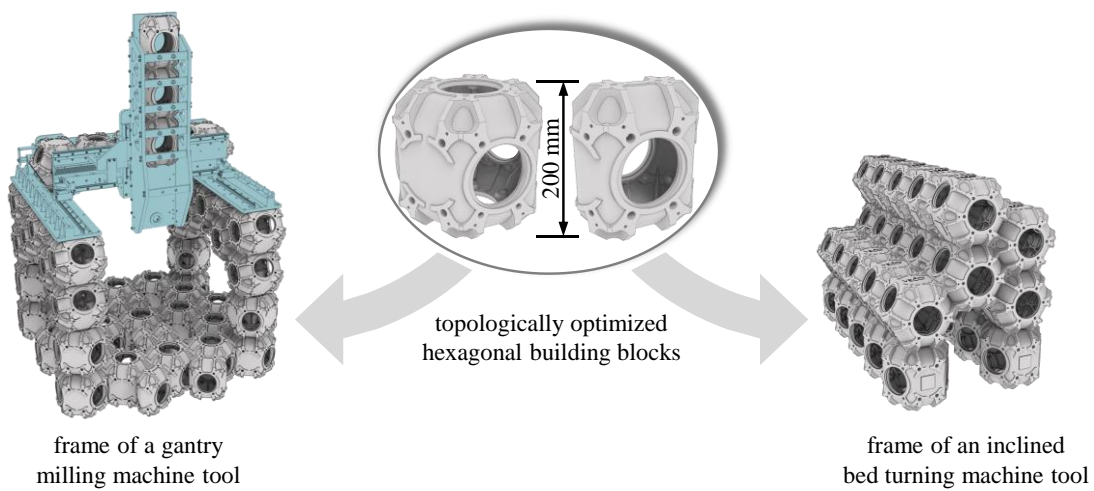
Building blocks LEG²O with two exemplary machine tool frames
